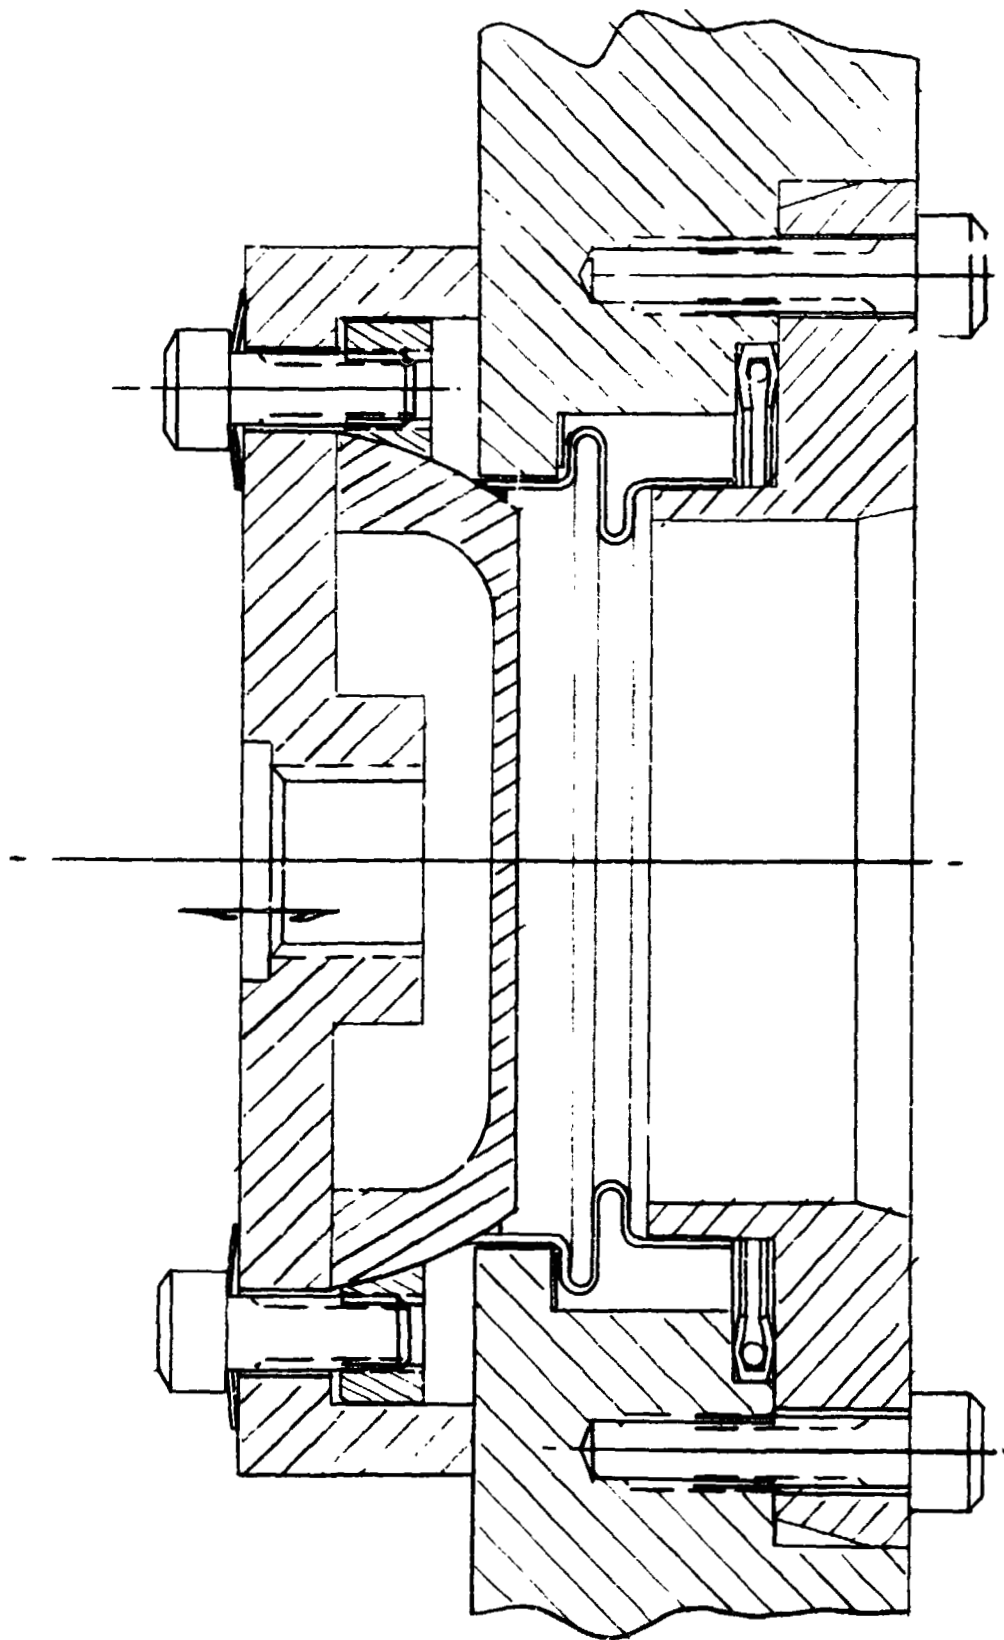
Spherical Copper Lip Seat, Bellows Loaded, Drawing No. L4678
